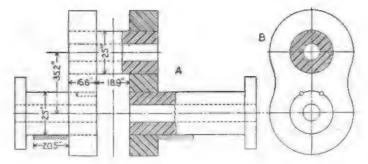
Section of Shaft for Large Passenger Steamer, pistons in Fig. 279 II. Scale 1 to 56.
